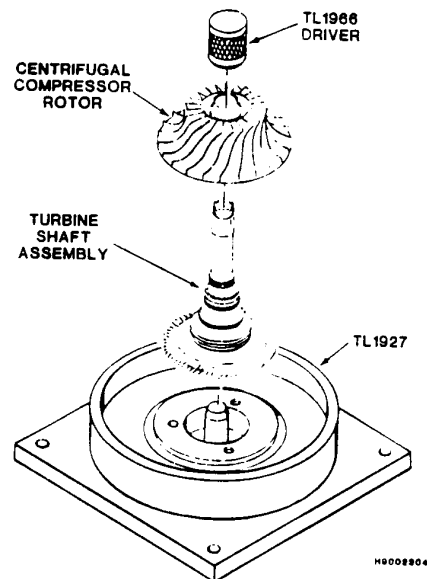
Installation of Centrifugal Compressor Rotor Using TL1966 Driver
